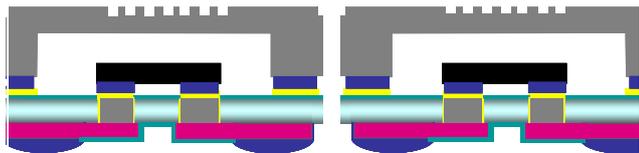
Singulated packaged die are ready for tape and reel and shipment
